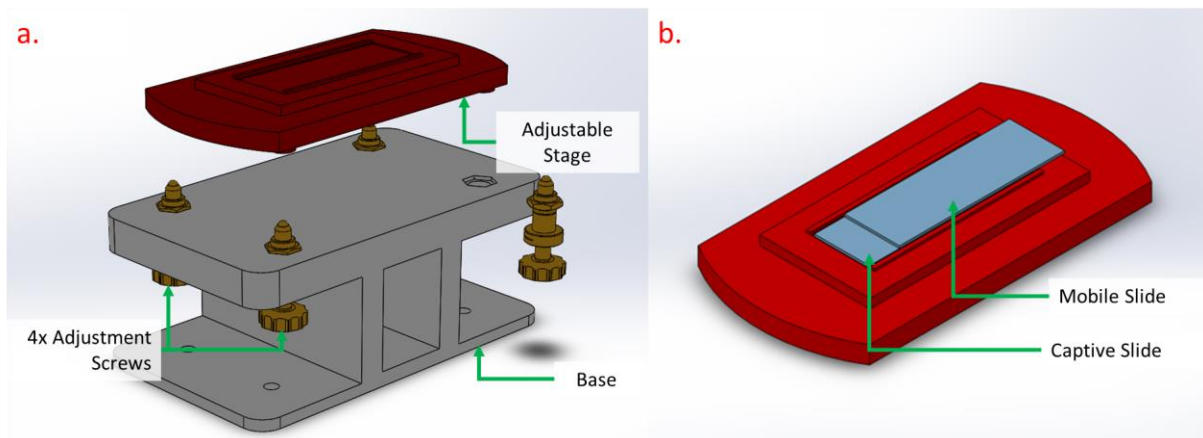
a. Exploded view of the base and adjustable stage; b. Illustration of slide travel on the adjustable stage
